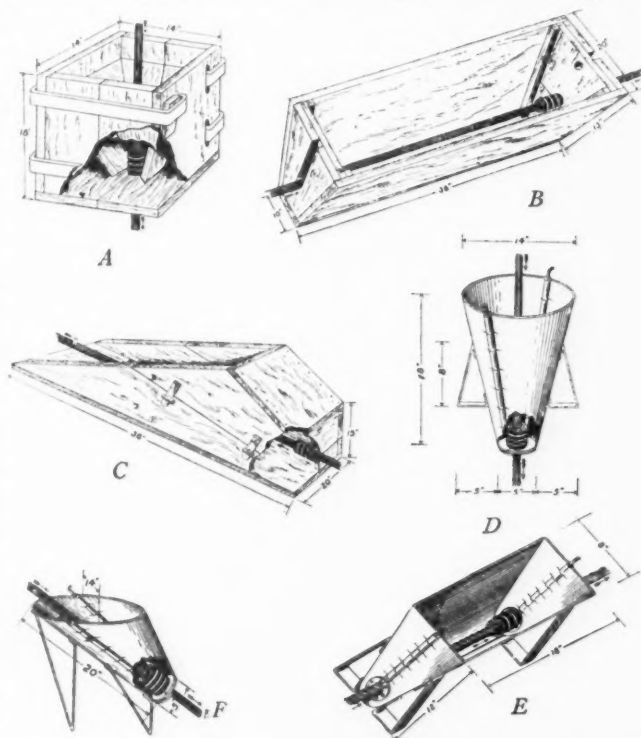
Constructional details of typical wire rope lubricating and treating boxes. A, B and C are of wooden construction. A, to treat a vertical rope; B, a horizontal rope; and C, a rope located at an angle. D, E and F are similar boxes of metal construction.
